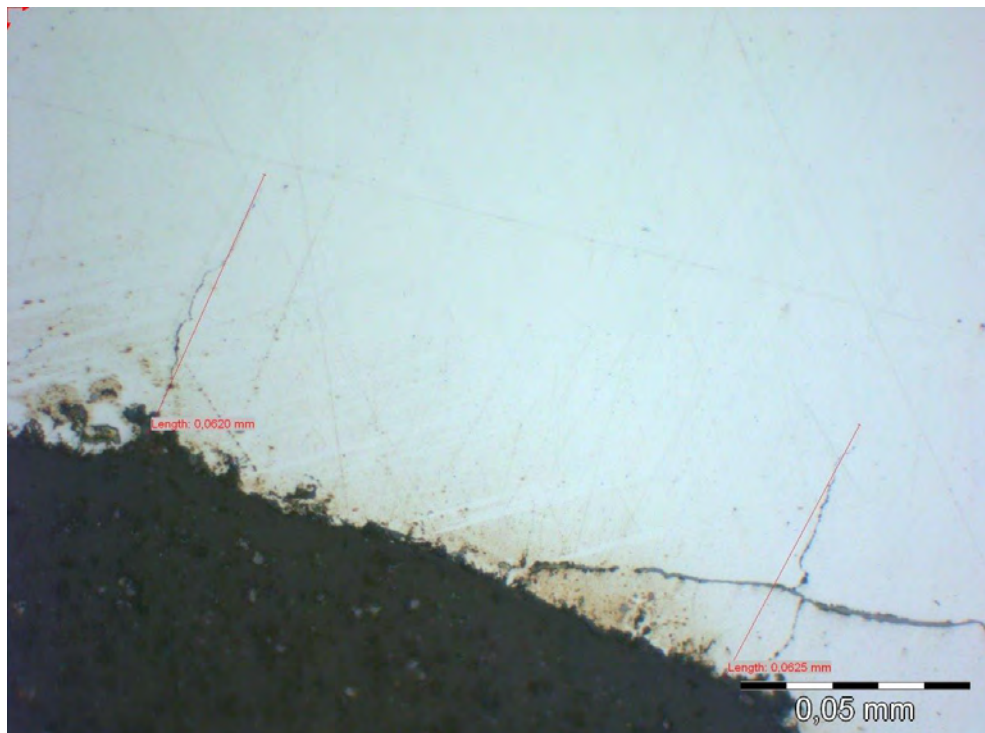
Cut two in crack at segment B, third ridge on barrel no. SFK 0120-A
